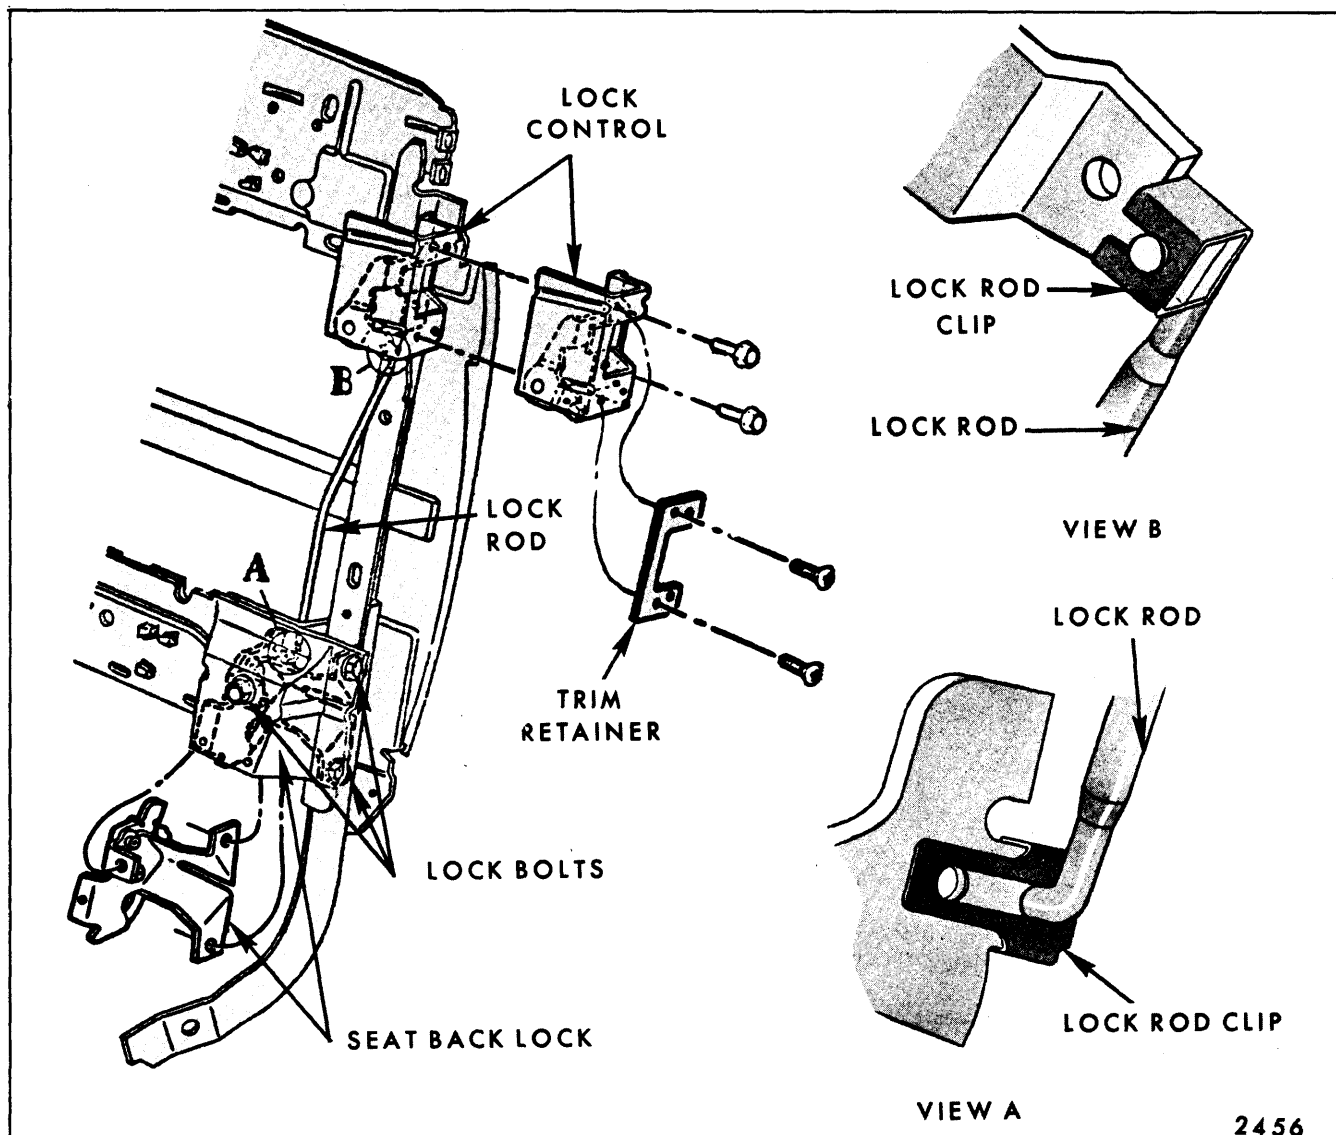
Front Seat Back Lock - "C & E" Styles with Standard Full Width or 60-40 Seats
